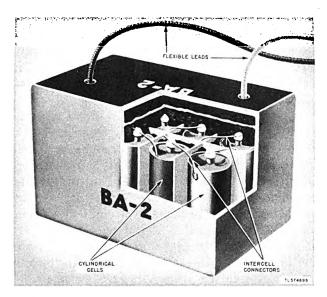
Assembly of a battery with cylindrical LeClanche cells.
